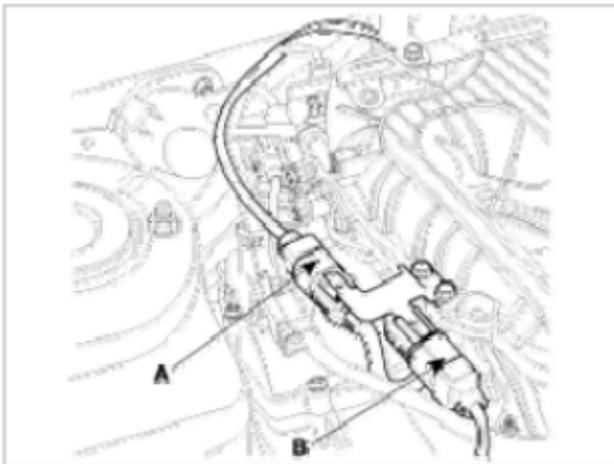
Locating RH Injector Connector And Ignition Coil Connector
